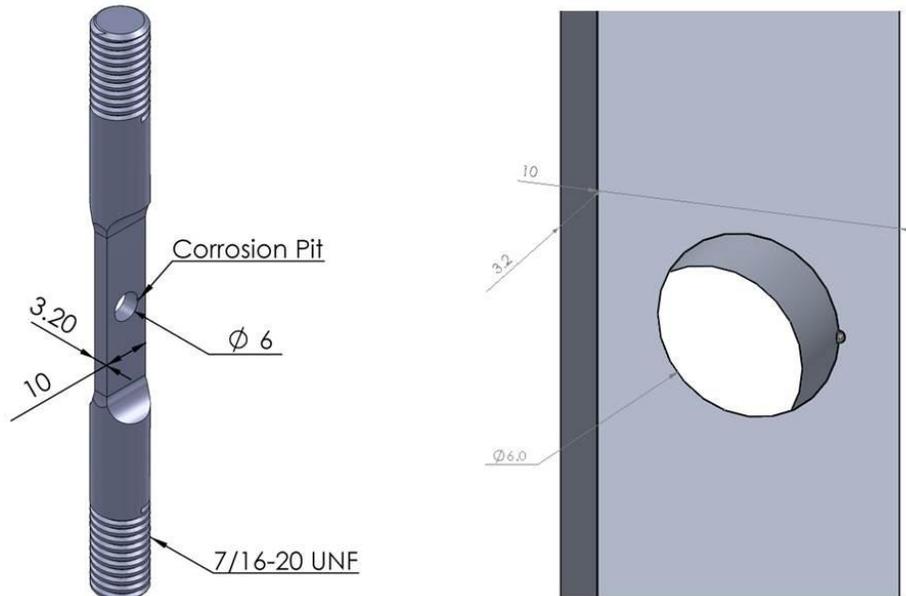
Specimen geometry with dimensions. All dimensions are given in millimeters (mm).
